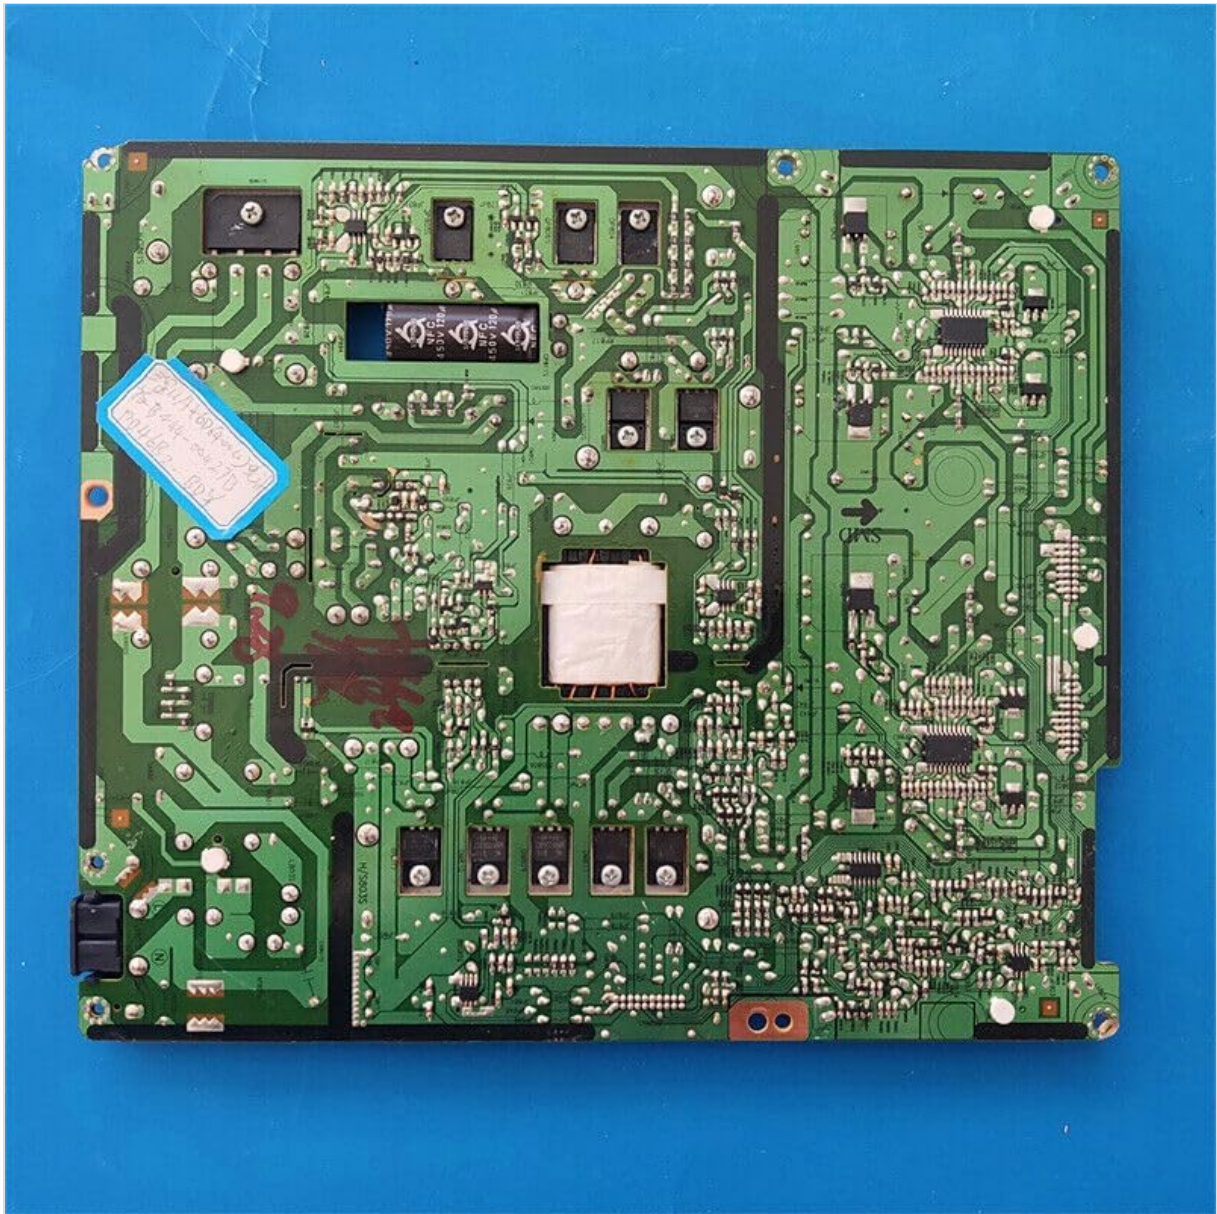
The underside of the power supply board, revealing the intricate green circuit traces and solder points. This view shows the complexity of the board's internal wiring.
